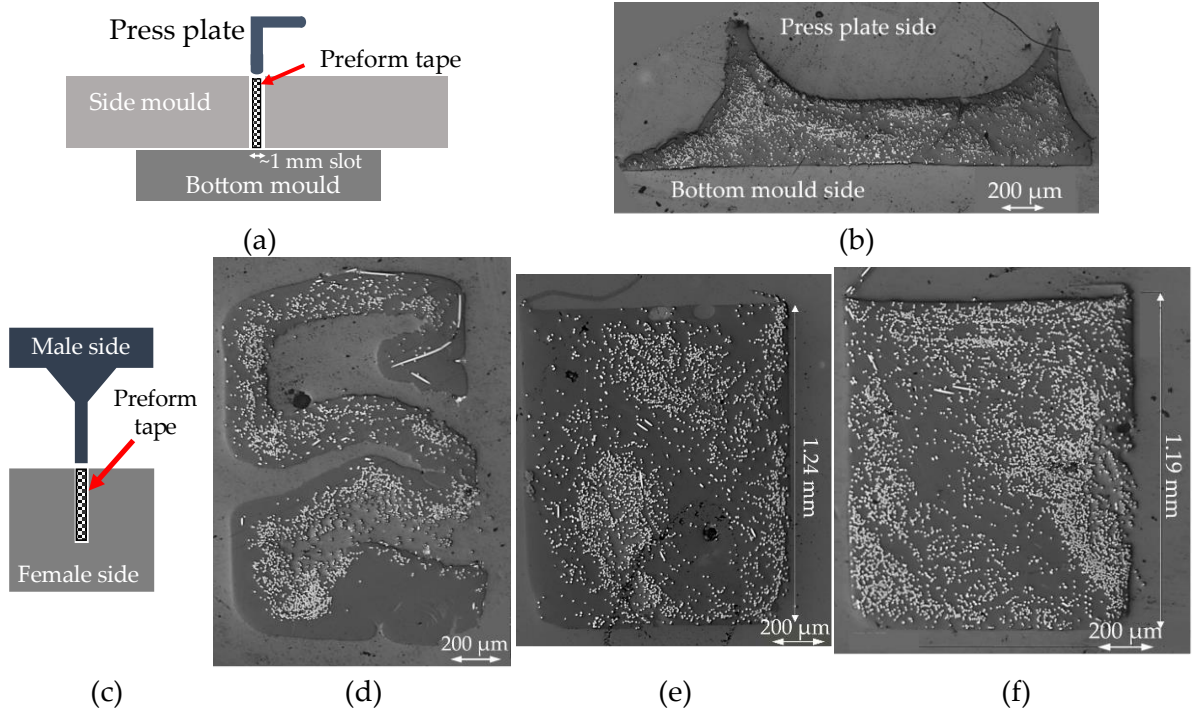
(a) Schematic of the 4-piece mould including three aluminium blocks and a press plate with a preform tape inside; (b) cross-section of the moulded filament after moulding with the 4-piece mould; (c) schematic of the 2-piece mould designed with a perfect sharp machined corner shape of the female and male mould; (d) cross-section of the moulded filament with the 2-piece mould under 150°C and 2 MPa condition showing folding tape without thermoplastic fusion; (e) and (f) cross-section of the moulded filament with the 2-piece mould under 200°C and 1 MPa condition at different positions: 120 mm and 240 mm.
